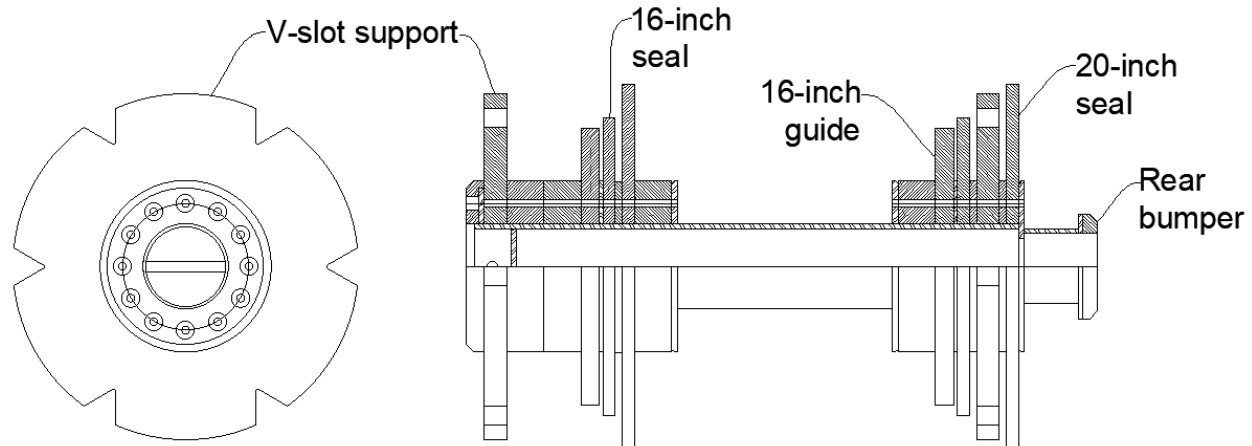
, Outline pig design for testing. A set of spares – alternative seals, larger 16-inch seals, spacers etc were also specified for test purposes.
